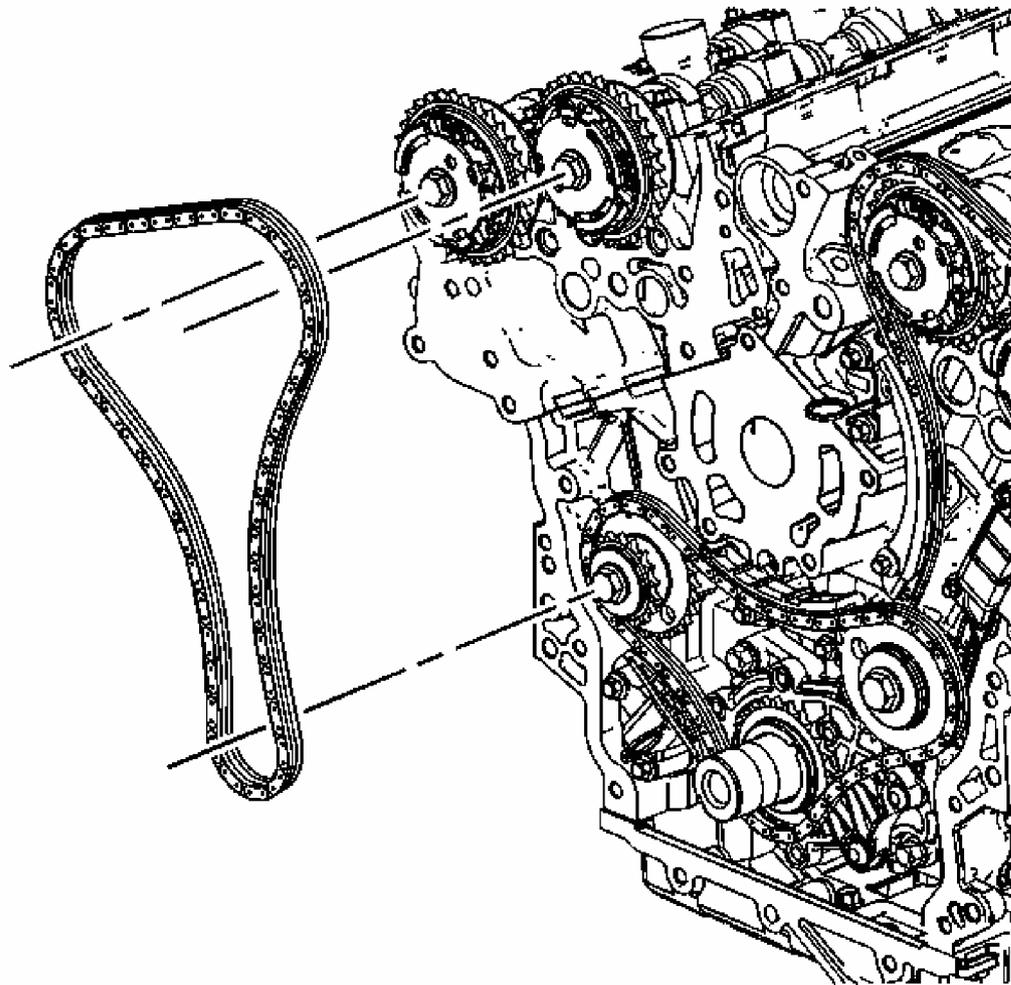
View Of Right Bank Secondary Camshaft Drive Chain
